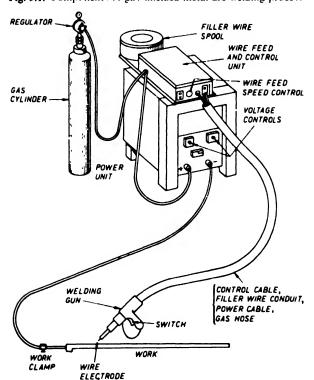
Components of gas shielded metal are welding process
